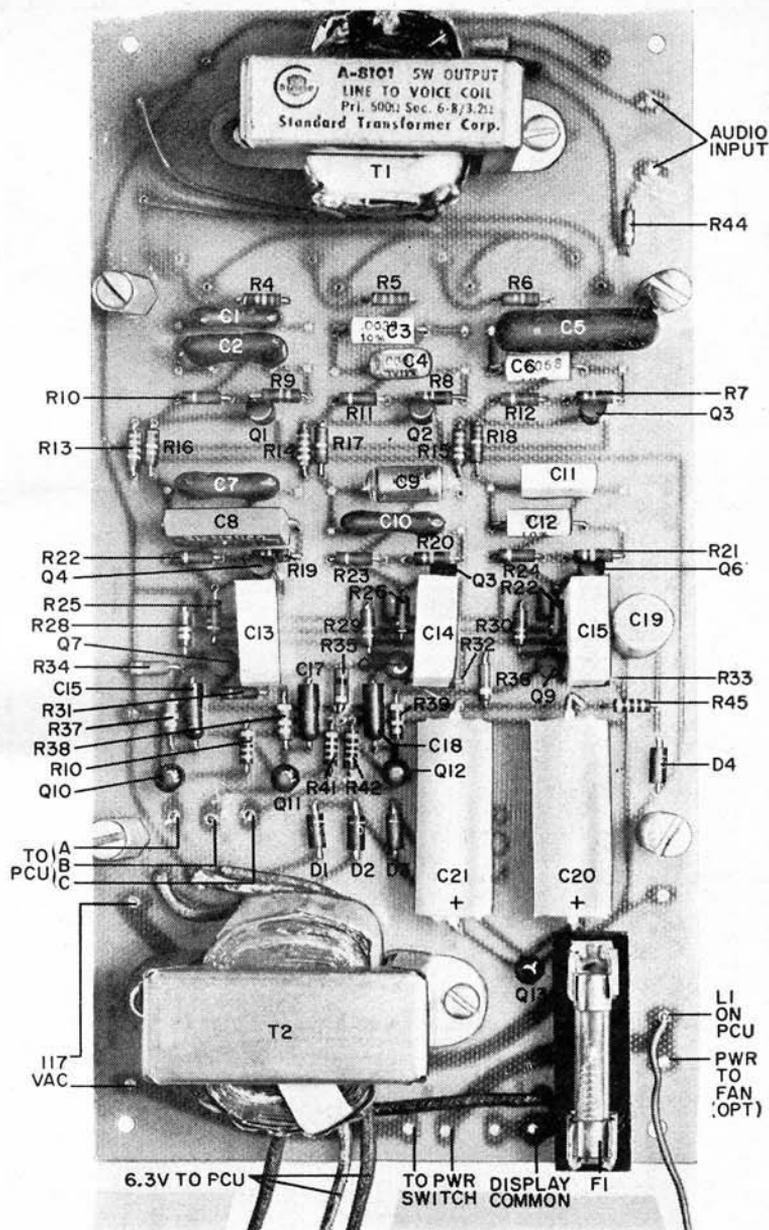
Component installation on QFU PC board. Also shown are connections made to the board.
